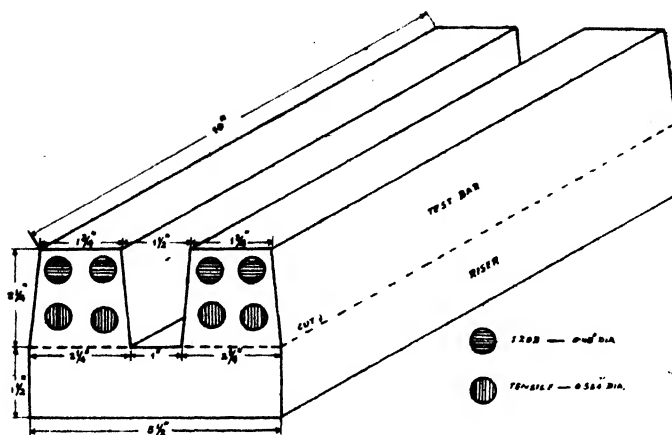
Outline drawing showing positions of test-pieces in test block.
